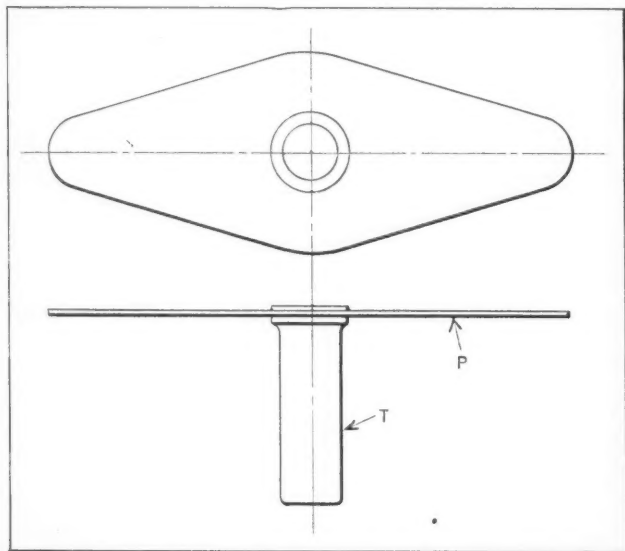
Tube Assembled to Flange on Die Shown in Fig. 2
